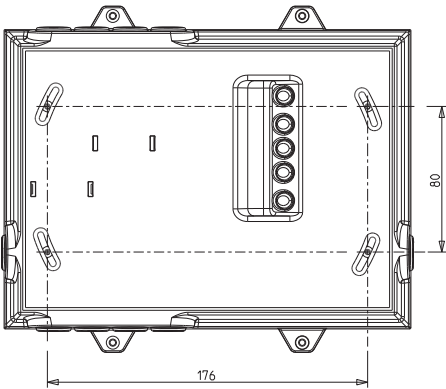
Back View of P-WDP - Fixing Screw Positions
